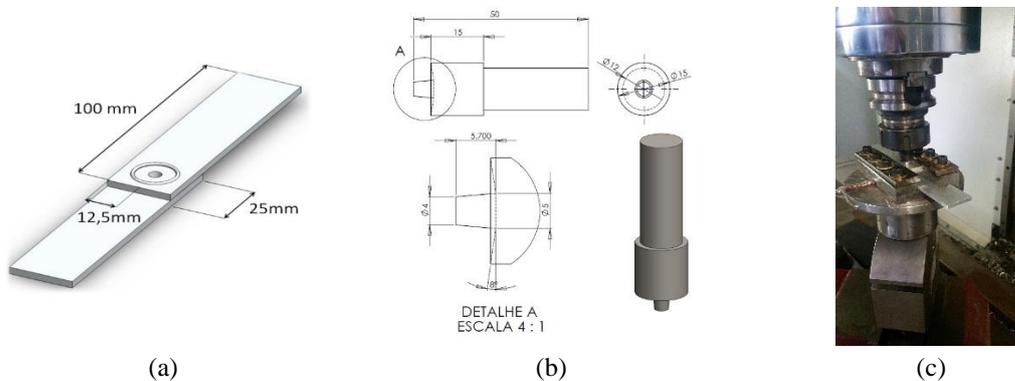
(a) Test samples, (b) welding tool and (c) welding setup.
